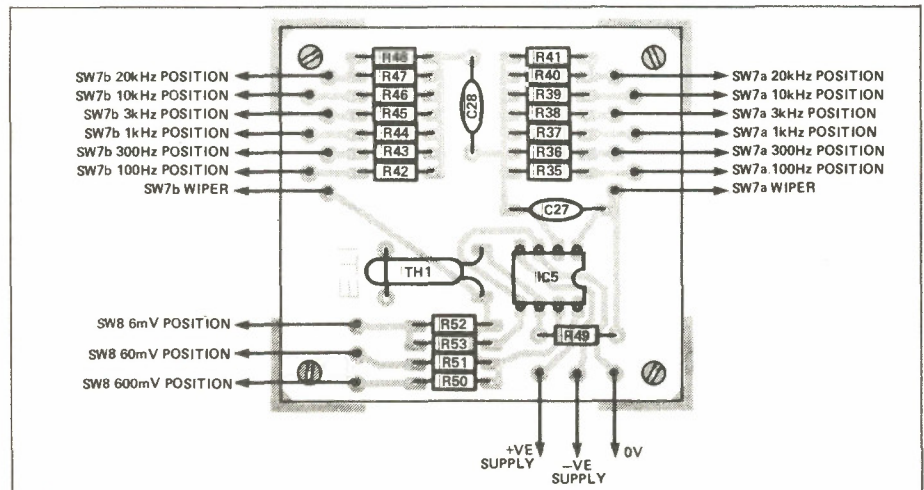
Component overlay of the spot frequency oscillator PCB.
